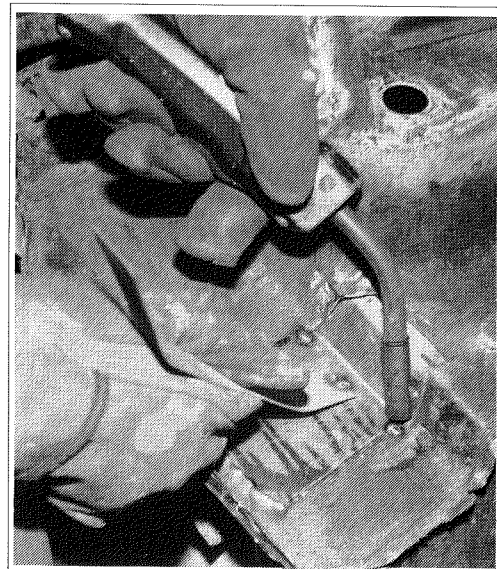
The repair can then be slotted into the hole and pulled up to make the fit with the aid of a metal strip handle temporarily welded in place. Tack weld the repair...
